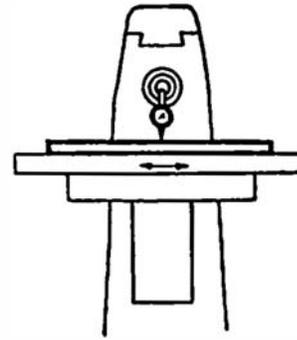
Parallelism between the Table Surface and the Direction of the Longitudinal Table Movement
